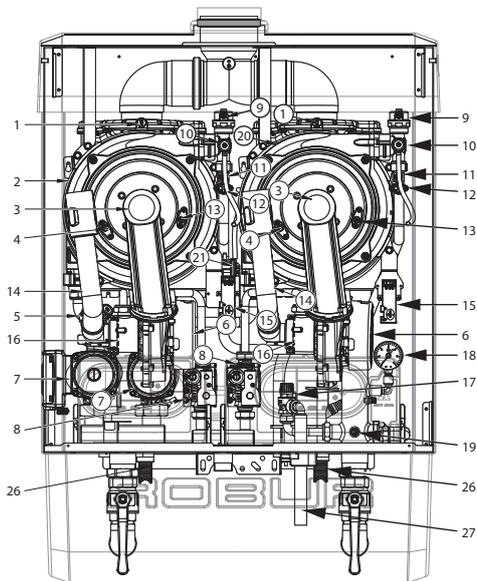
Internal hydraulic plan of Caldaria 55.1
